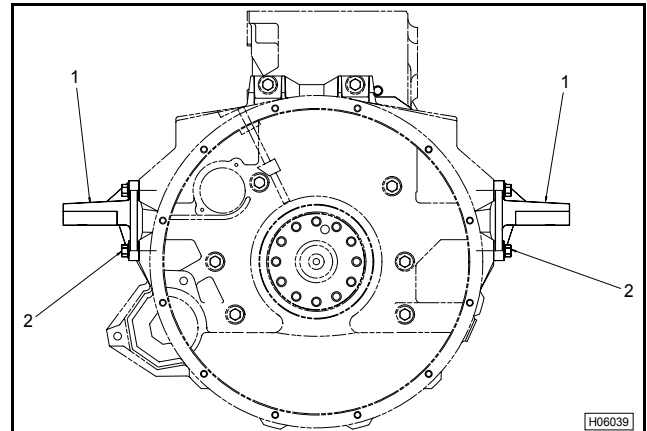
Loosening engine mounting bolts (148-tooth ring gear only)
